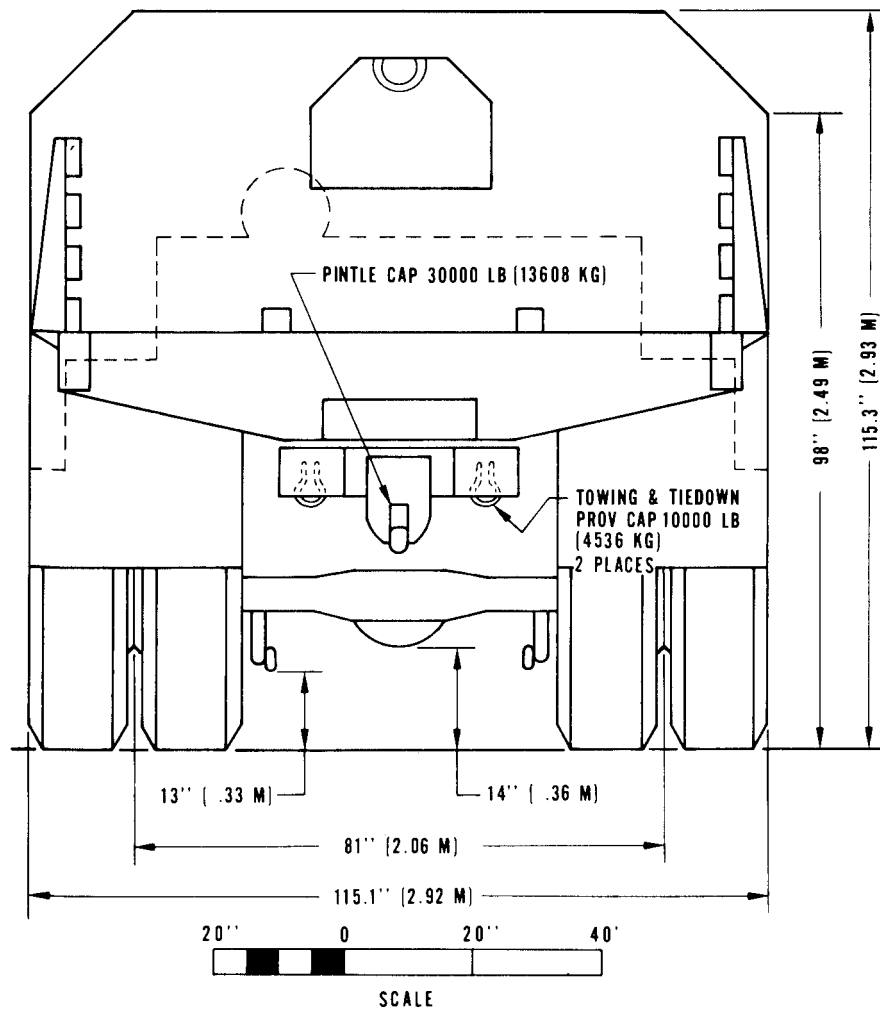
Rear elevation, truck, stake, bridge transporting, mounted on M139 chassis.
